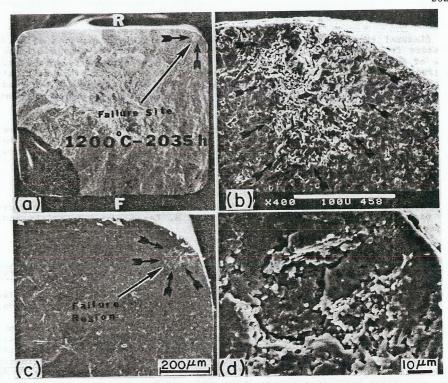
SEM fracture surfaces of sintered α -SiC specimen tested in uniaxial tensile stress rupture mode at 1200°C in air. (a) Overall view (bottom half) showing failure site; black mark at bottom left is aquadag. (b) Enlarged view of failure site showing that failure region is distinct in appearance from the remainder of the fracture surface and shows limited SCG. (c) Upper half of the specimen showing failure site is internal. (d) Enlarged view of failure site seen in (c).
